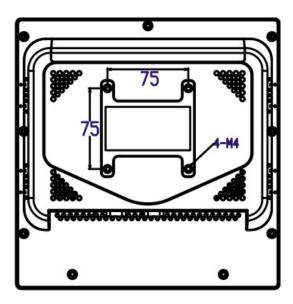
ACT-08A-ATOM Arm Mounting Retention Screw Holes
